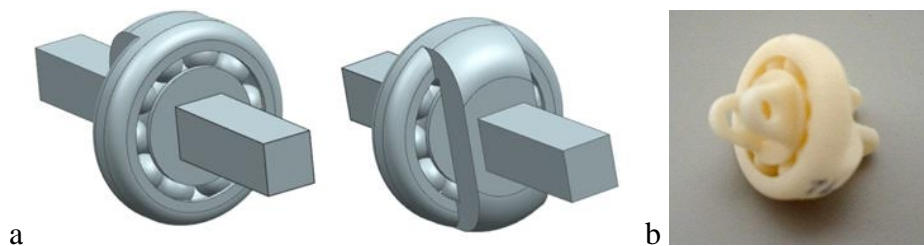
Bearing III. a: CAD model front- and back-view. b: Printed part
